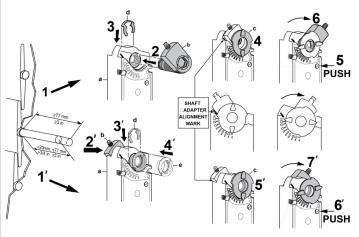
Shaft Adapter Placement for Counterclockwise Rotation on Short and Long Shafts.
